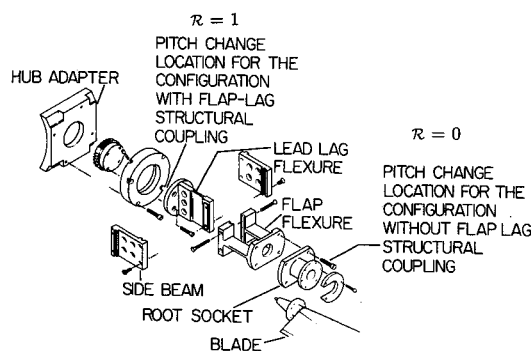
Exploded view of blade and flexure assembly.<sup>4</sup>
